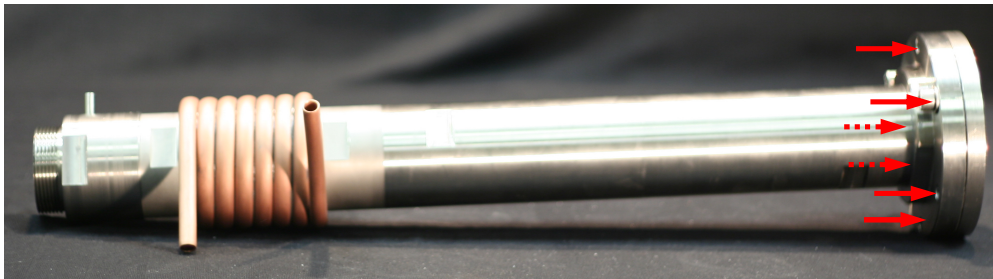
A Six-bolt pattern attaches the top die-holder to the top die-ring. The top die-ring is no longer allowed to spin.
